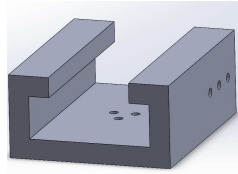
Solidworks CAD of Sample holder, with holes for the attachment to the force sensor on the bottom, and holes for the position holding of the sample on the side.
